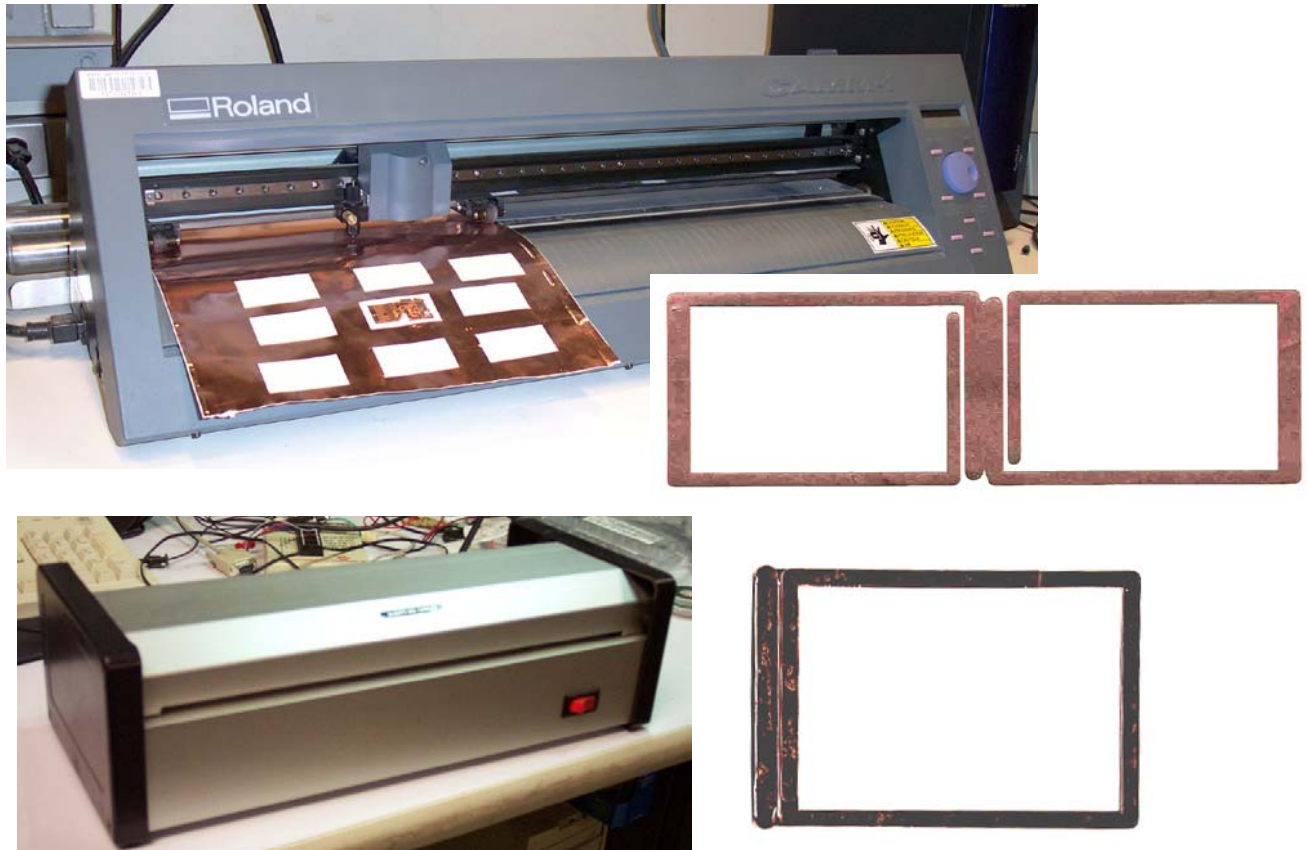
Equipment used to fabricate tags. (top) Roland programmable knife vinyl cutter machine and image of unfolded copper layer. (bottom) Lamination machine and image of completed tag after folding, dielectric insertion and lamination.
